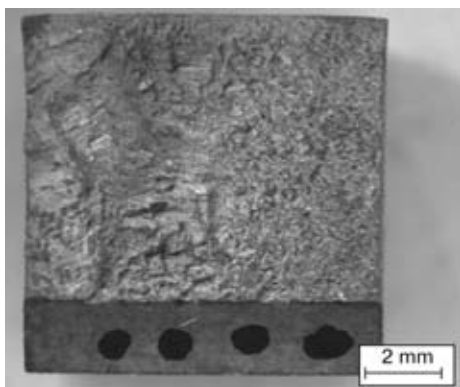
General view of fracture surface containing TIG weld after impact strength test
